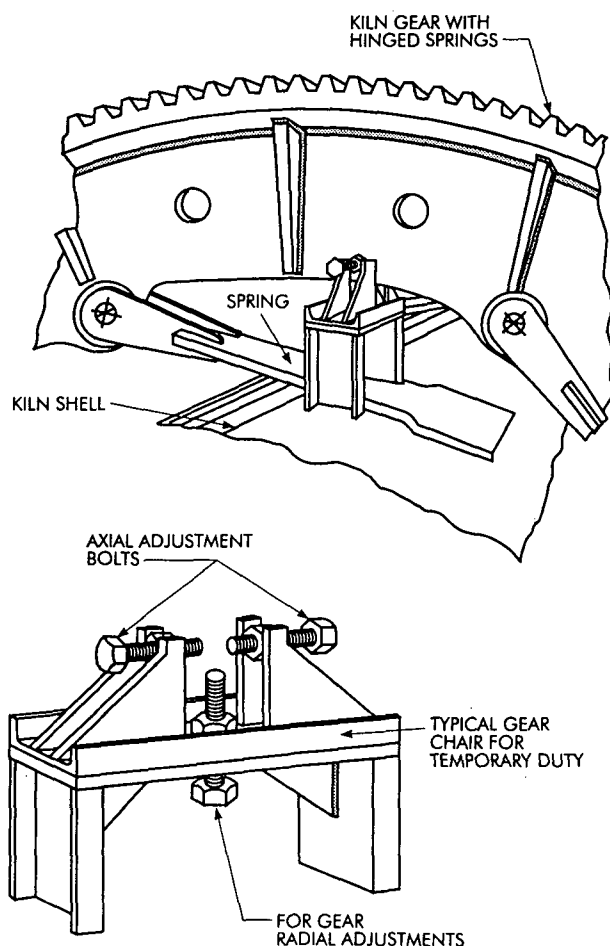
TYPICAL SUPPORT CHAIR FOR A KILN SPRING GEAR
